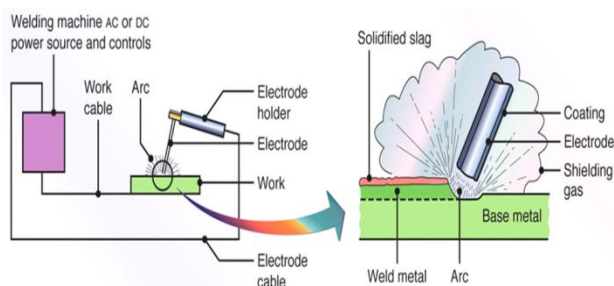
SMAW Welding (Serope Kalpakjian, 2006)
